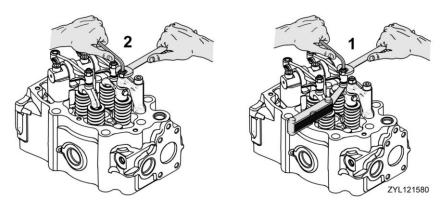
Outlet valve bridge / rocker arm valve clearance
